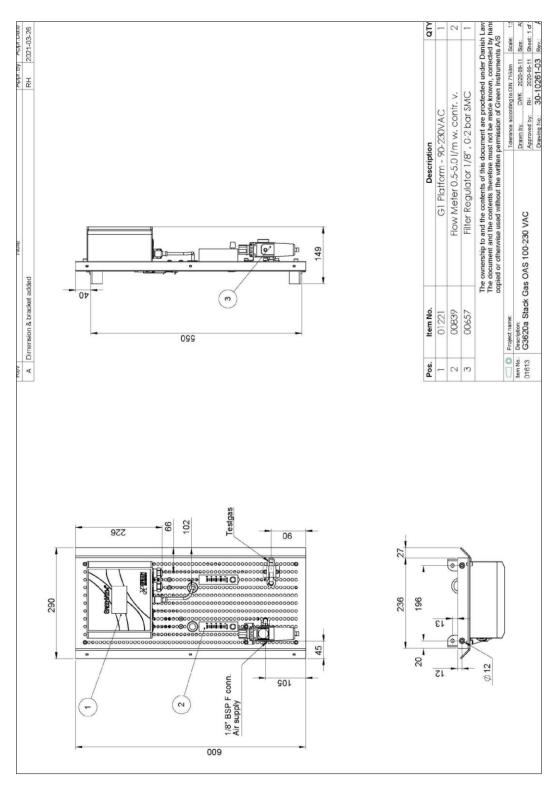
Analyzing Board with G36a Oxygen Analyzer Mounted on Board
